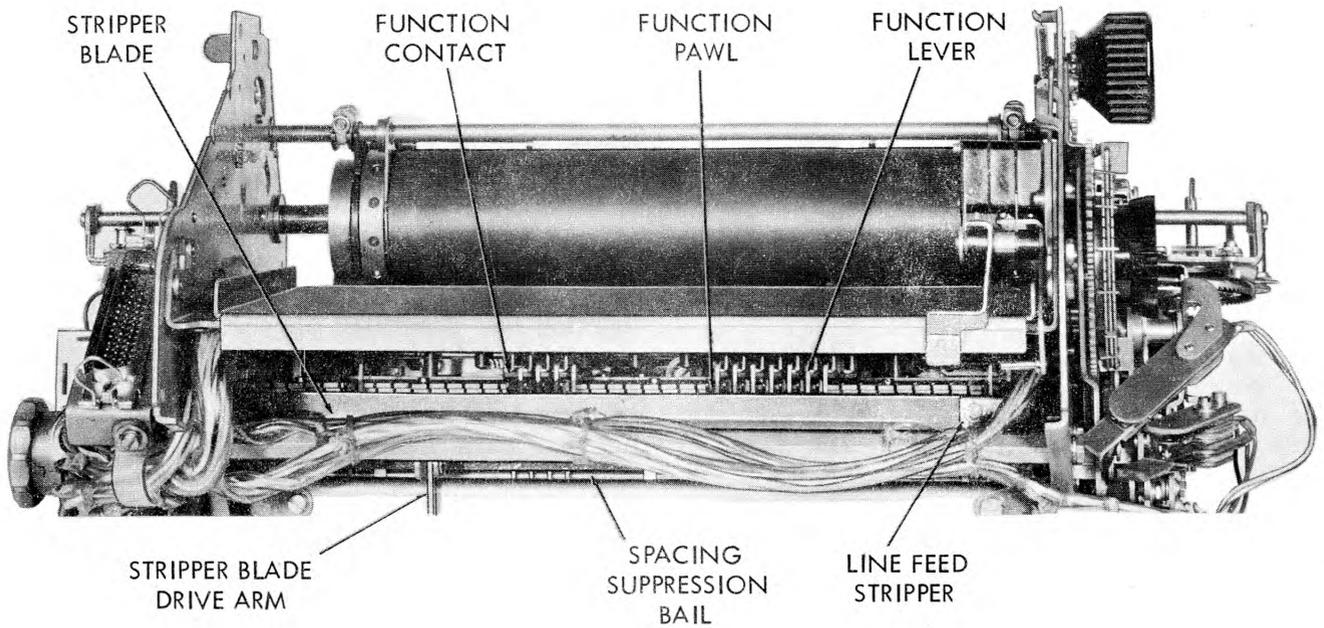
Stunt Box Installed in Sprocket Feed Typing Unit (Rear View)
